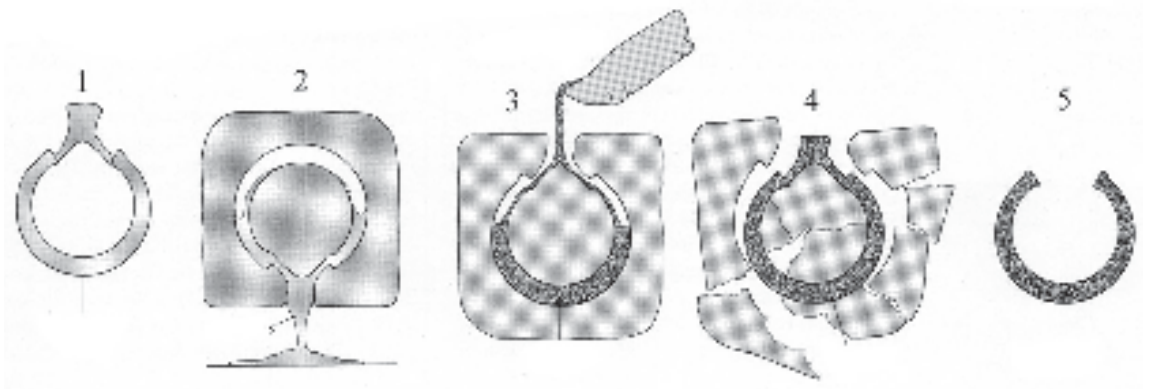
Schematic drawings of the lost-wax casting process. (1) Wax model with casting channels and casting funnel; (2) clay investment (casting mold) and removal of melted wax after drying; (3) filling of the remaining cavity with molten metal; (4) breaking of the clay mold jacket after cooling; (5) raw cast product after the removal of channels and casting funnel (after Wübbenhorst and Engels 1989, p. 14, Fig. 7).
